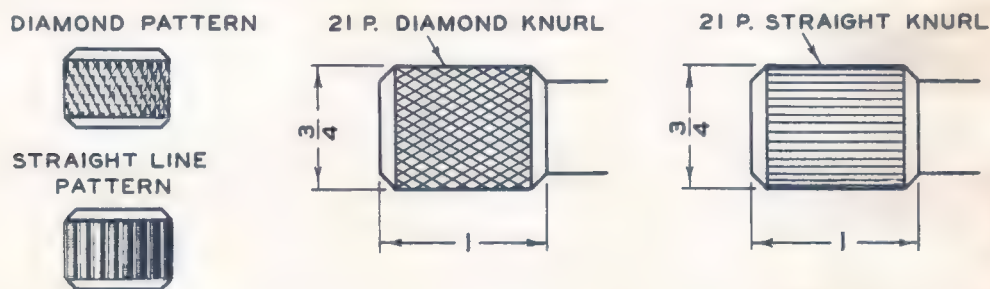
DIMENSIONS AND NOTES FOR KNURLED SURFACES
